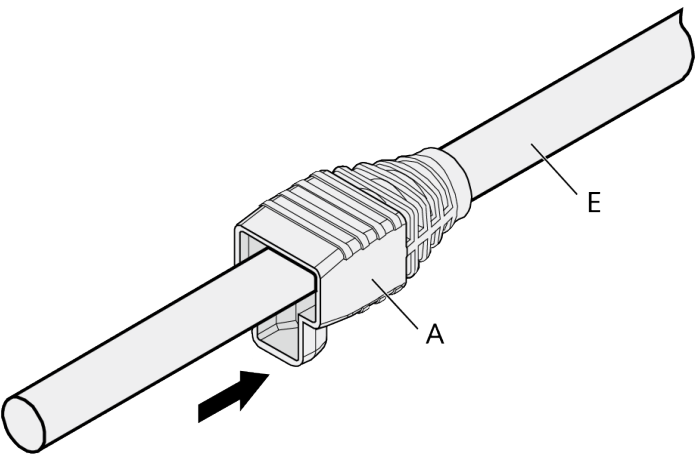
Shielded RJ45 connector and Ethernet cable
